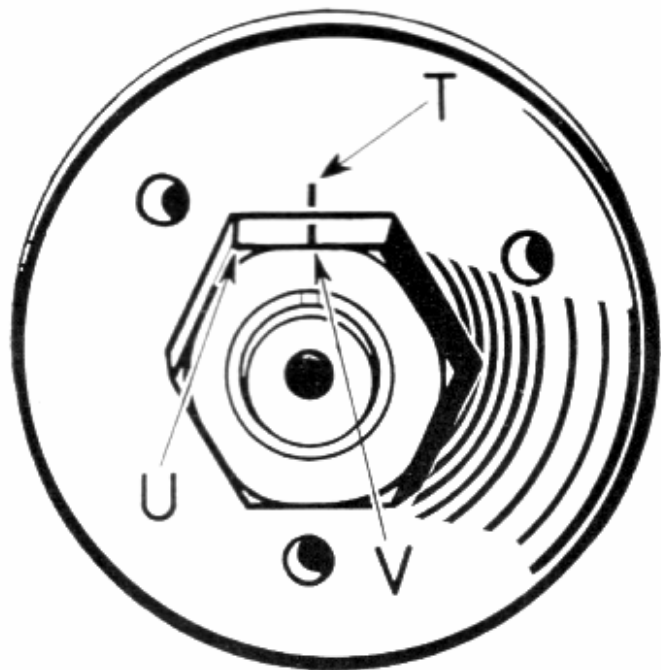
Markings of Hub and Nut for Bearing Tension shaft. This should be a hand push fit. Tightness can be caused by tight fitting splines or the inner wheel bearing cone in the steer-
